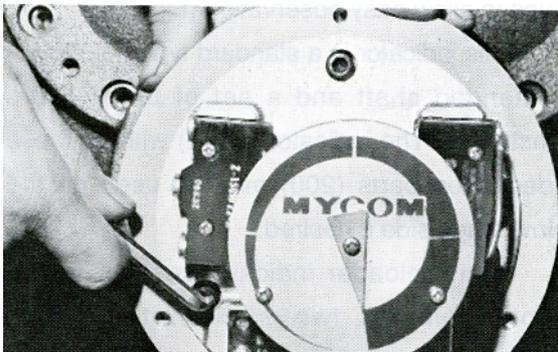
Loosening high-stage micro-switch base plate fixing bolt
